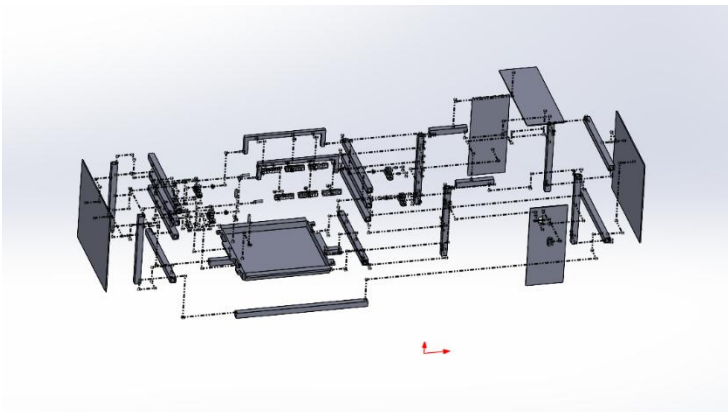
Exploded View Semi-Automatic Traditional Malay Kuih Machine
